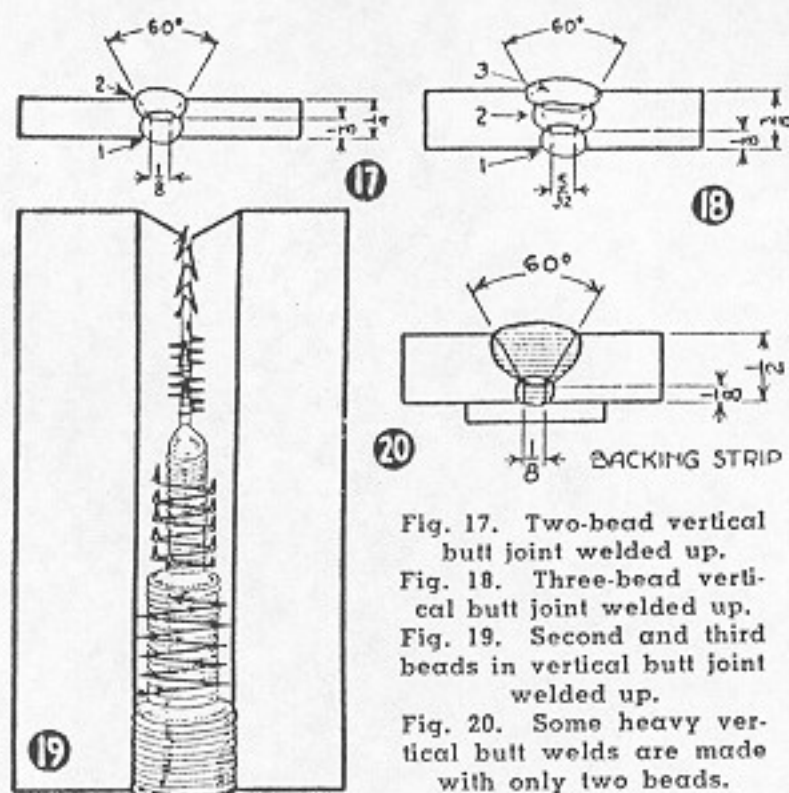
Two-bead vertical butt joint welded up.
